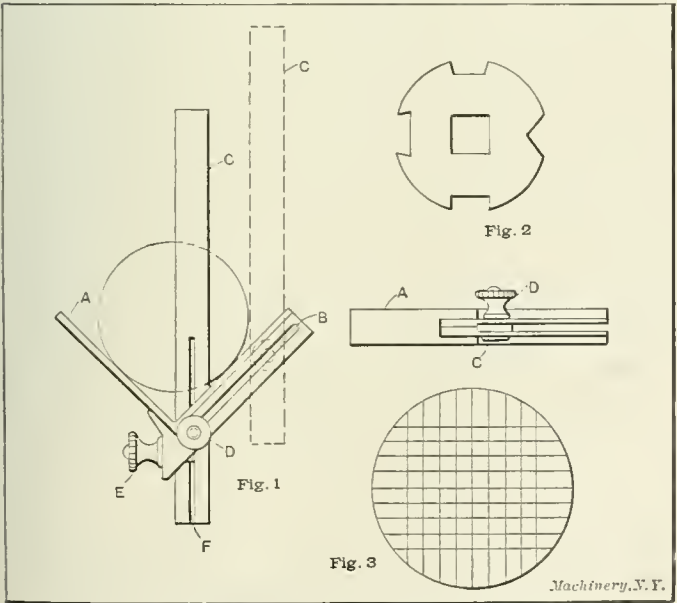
Improved Centering Head. Figs. 2 and 3. Some of the Possibilities of the Improved Centering Head
